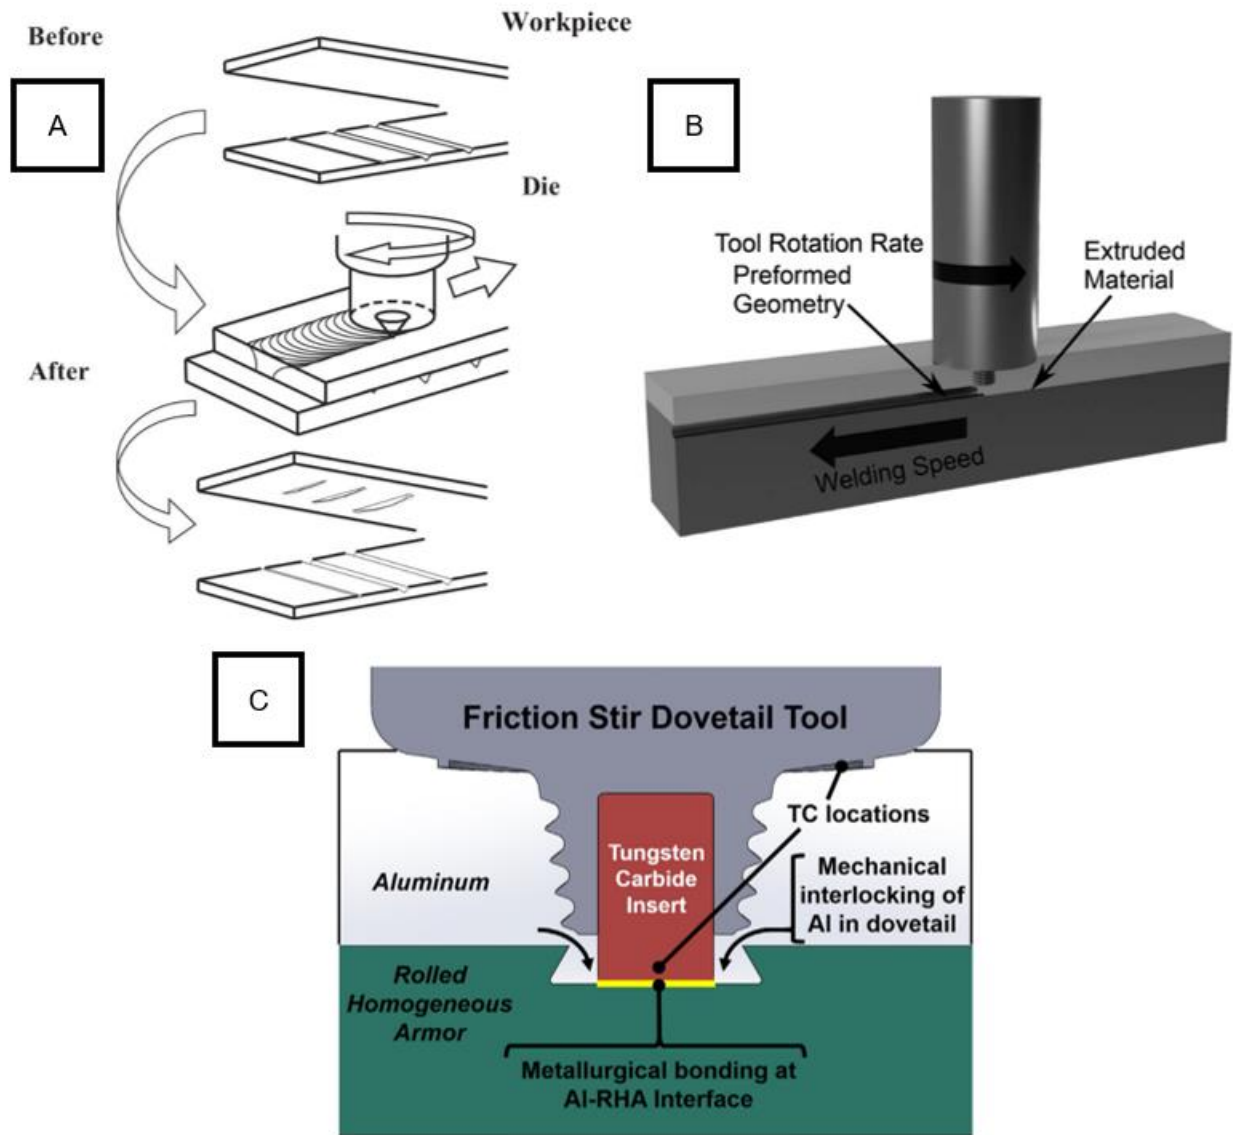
FSW derivative processes. A: Friction stir forming (FSF) [51]. B: Friction stir extrusion (FSE) [52]. C: Friction stir dovetailing (FSD) [50].
